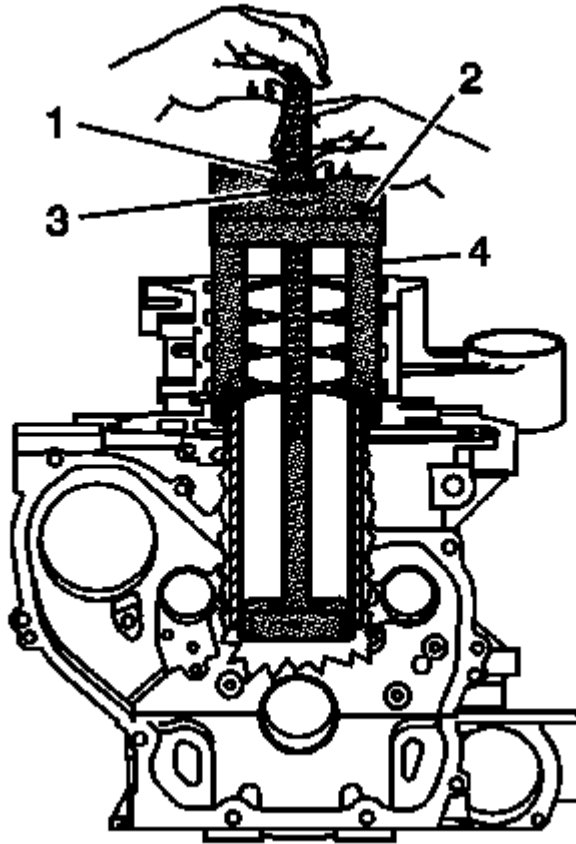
Aligning Cylinder Bore Sleeve Puller
